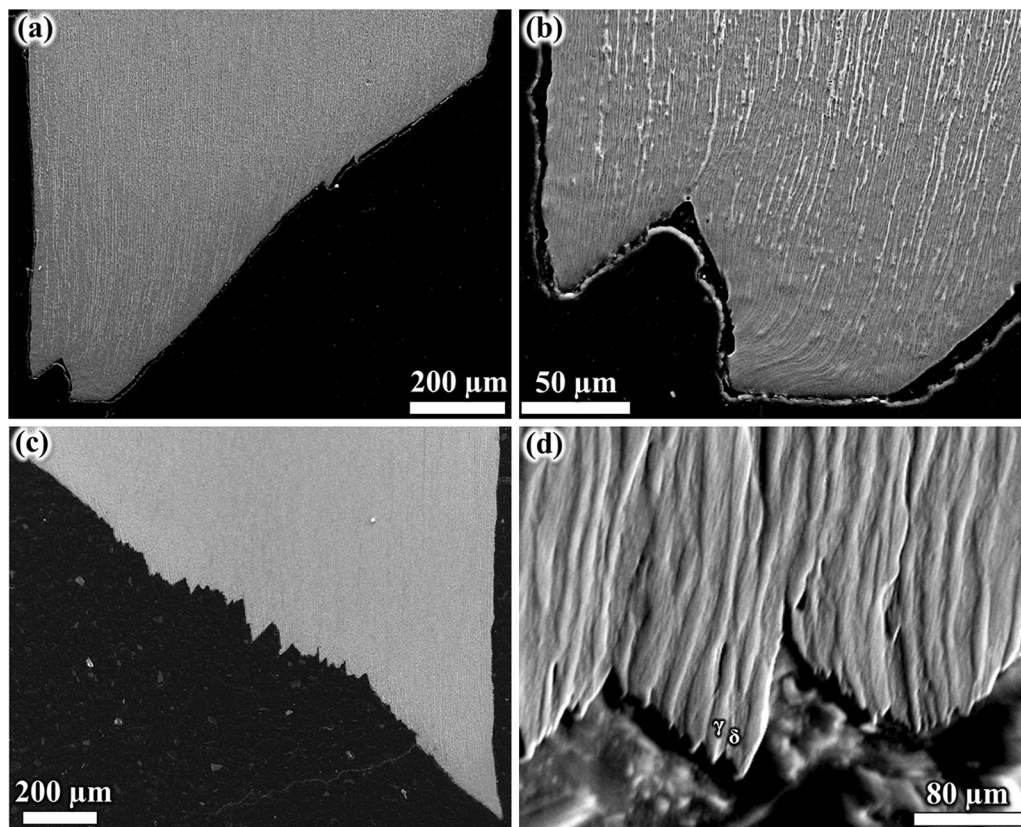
Cross-sectional fracture surface of (a) and (b) the as-received tensile specimen and (c) and (d) the tensile specimen preaged at 748 K (475 °C) for 255 h.
